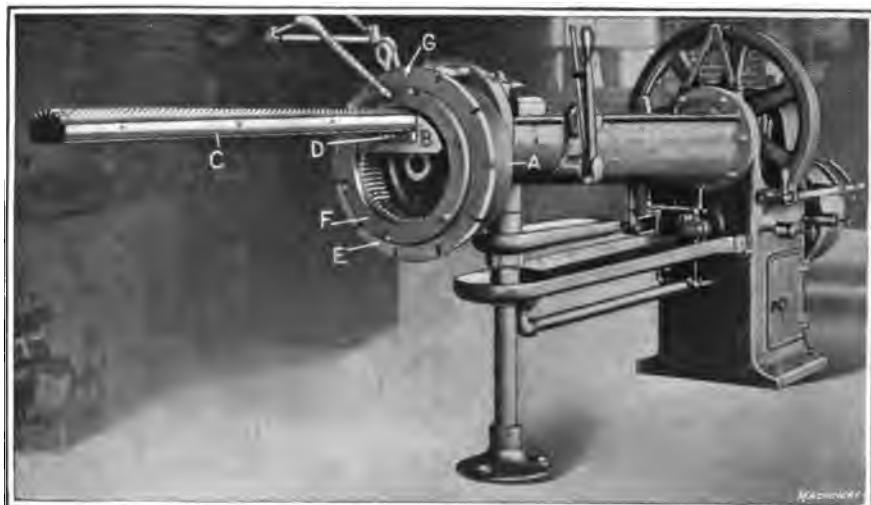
Broaching Machine equipped for broaching Teeth of Internal Gears
